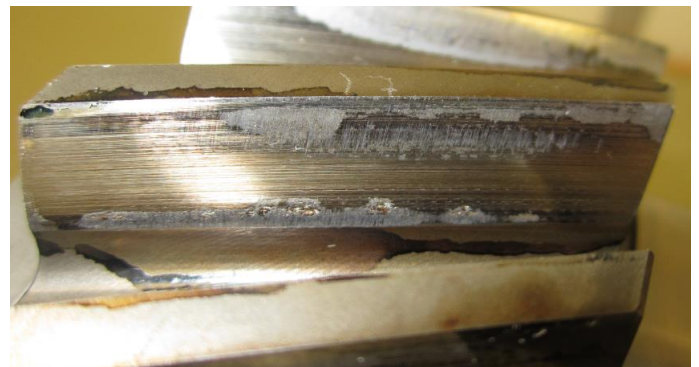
Photo showing typical surface degradation of an as-ground test gear after its being run for 48 million cycles. Gear flank surface is seen to be populated with micropitting and macropitting.
